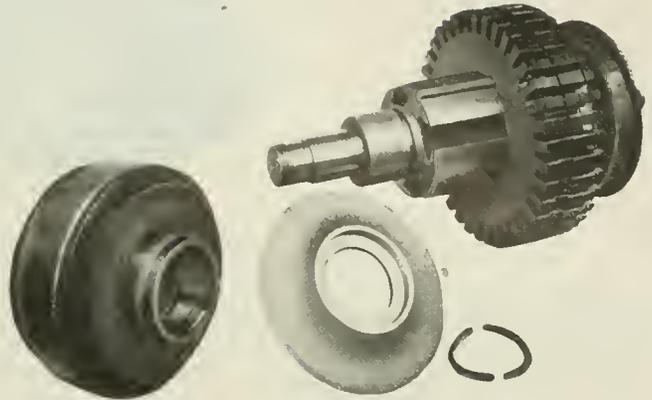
Commutator and Armature (without winding) of HM-803 Motor
